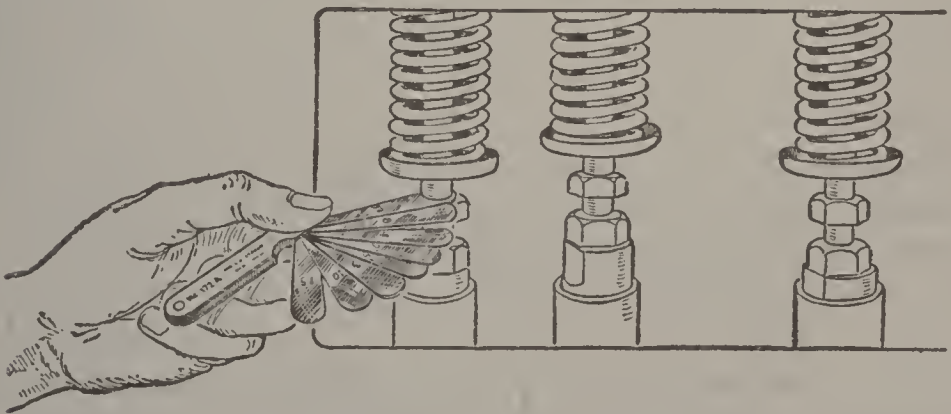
ADJUSTING TAPPET OR PUSH RODS
